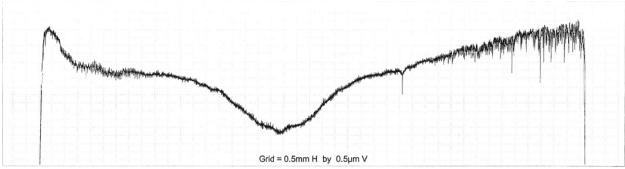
Exhaust Camshaft Fuel Pump Lobe #9, Nose A
